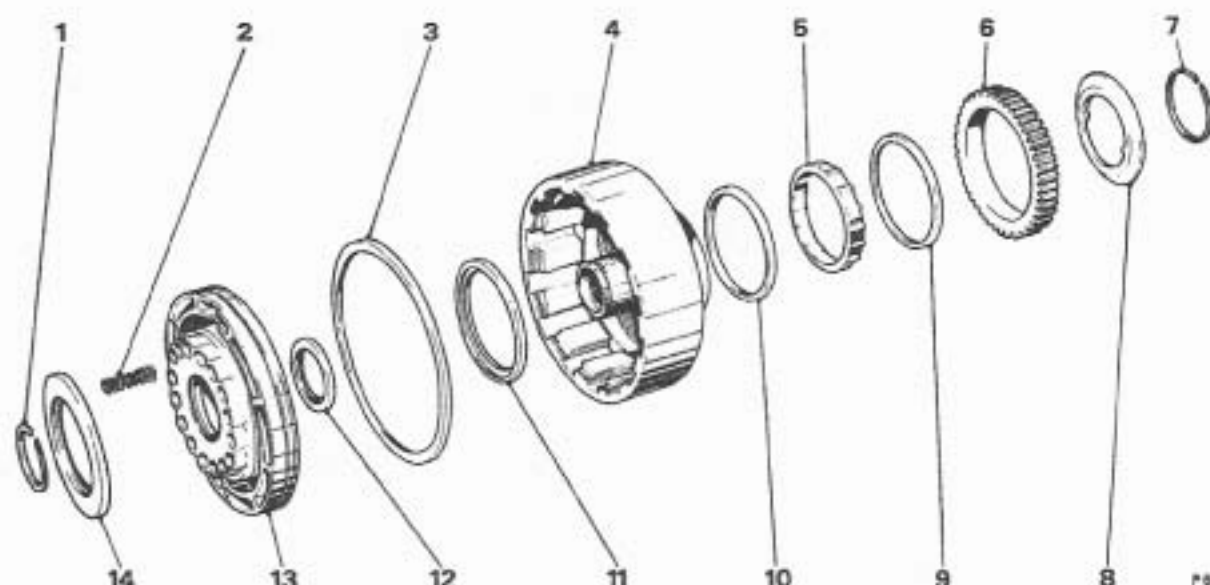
DIRECT CLUTCH AND INTERMEDIATE SPRAG ASSEMBLY
